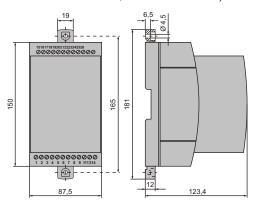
RISH Ducer M01 in housing T24, screw hole mounting brackets pulled out.
